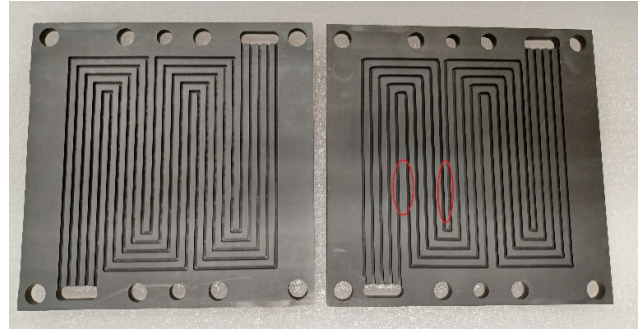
Anode flow fields machined with the same end mill: the first plate (left) and the fourth plate (right). The figure shows that as the tool wears, the TCP deviates from the programmed toolpath in a direction perpendicular to the tool trajectory.
